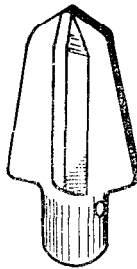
TYPICAL SKETCH OF DRILL POINT BORER
